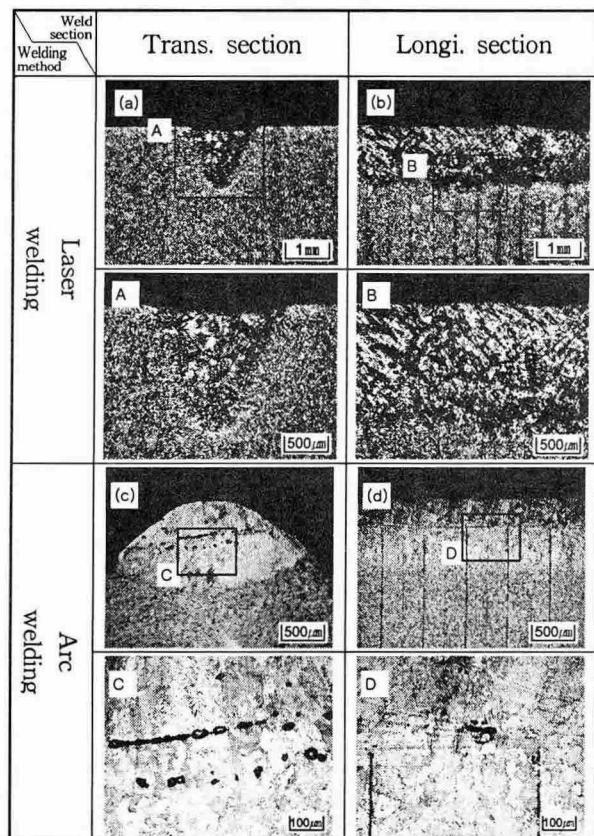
Appearance and defects of weldment by pulse laser and arc heat source
